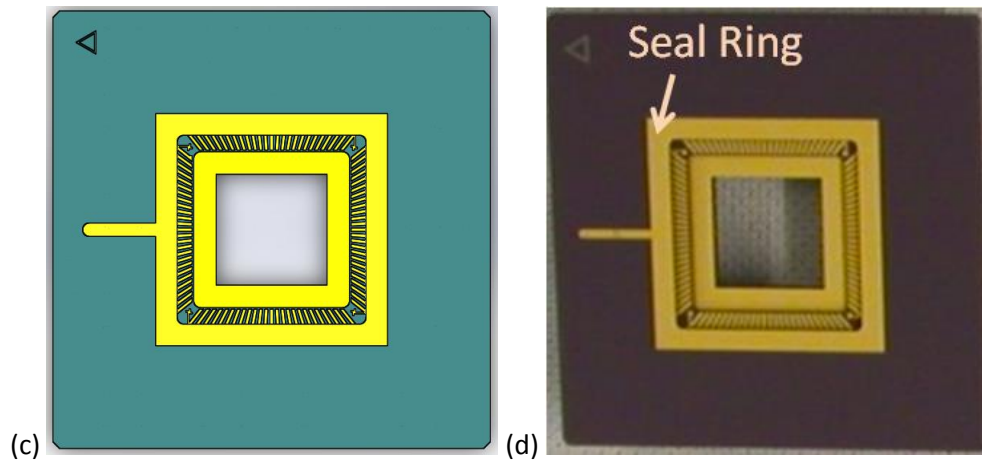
(a) Ceramic PGA package (b) Picture of package with seal ring labeled
